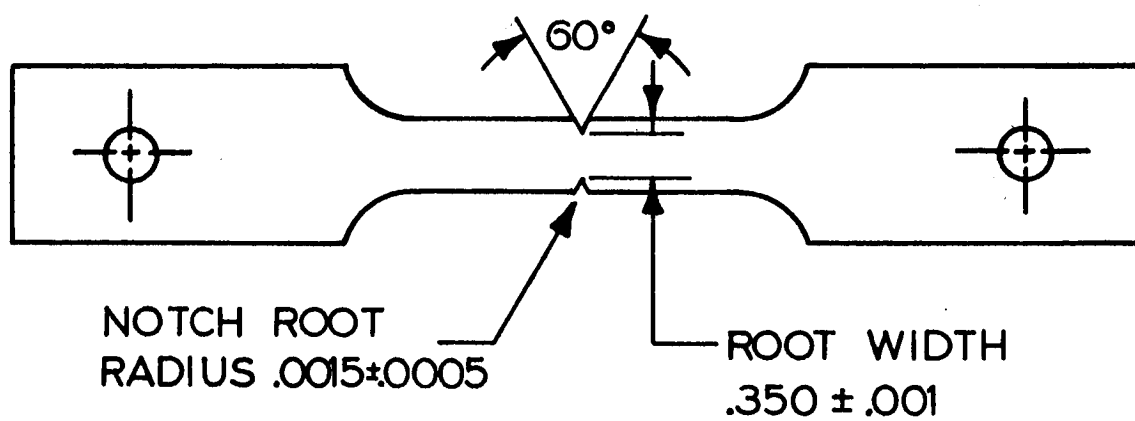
EDGE NOTCH TENSILE SPECIMEN
